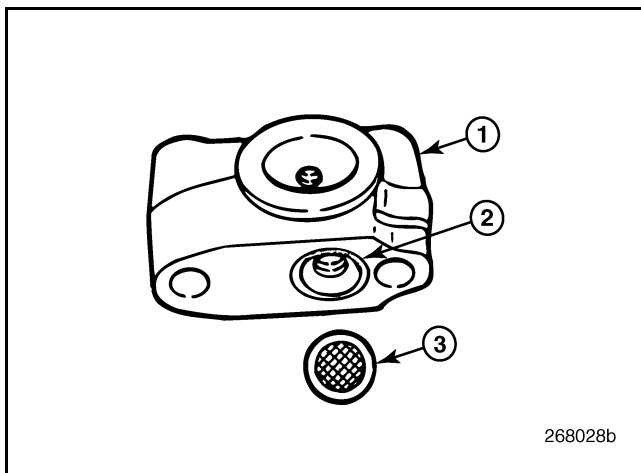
Oil Supply Screen in Front Mounting Bracket
